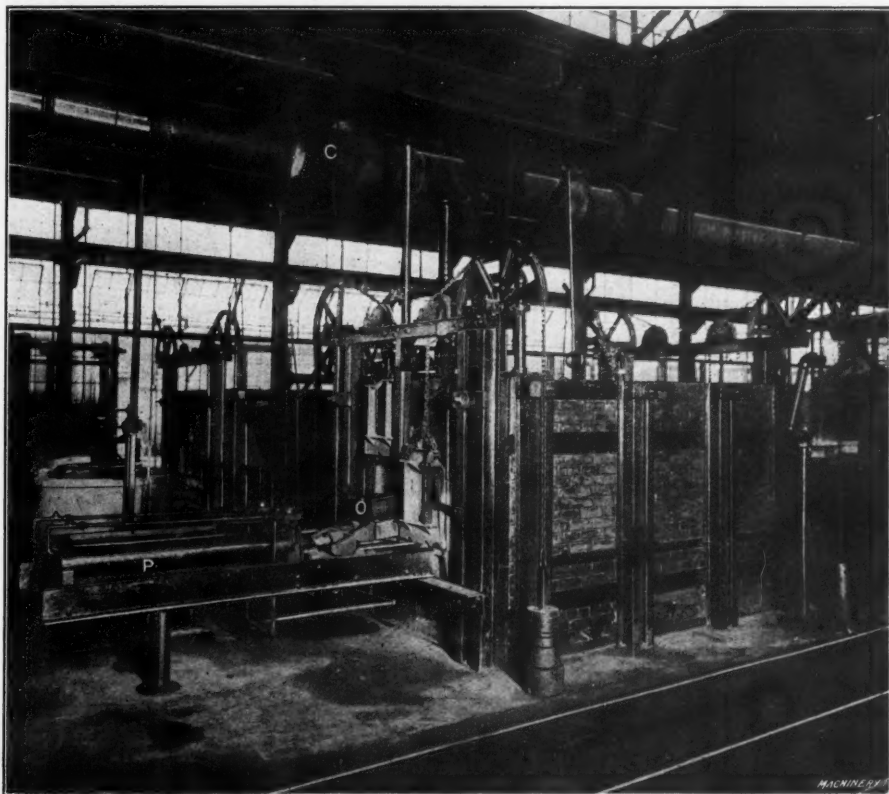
Intake End of Special Furnace for hardening Forging Dies
